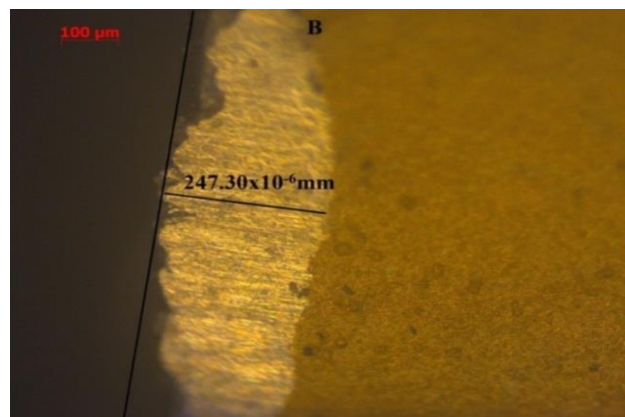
(b) Flank wear for CVD coated tool for spindle Speed 600 RPM, depth of cut 0.6mm, feed rate 0.08 mm/rev
